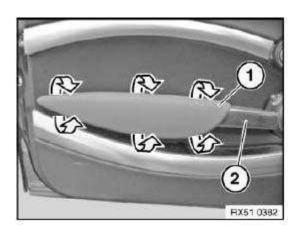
Removing Armrest From Door Handle Courtesy of BMW OF NORTH AMERICA, INC.
